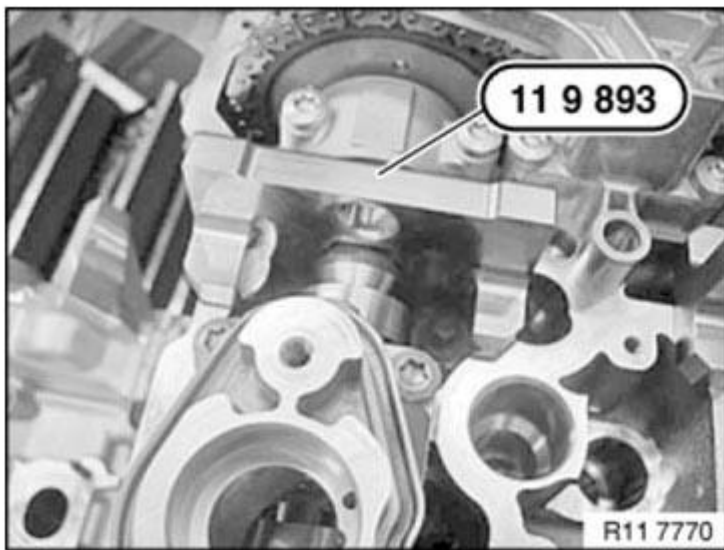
Identifying Special Tool 11 9 893 On Exhaust Camshaft
